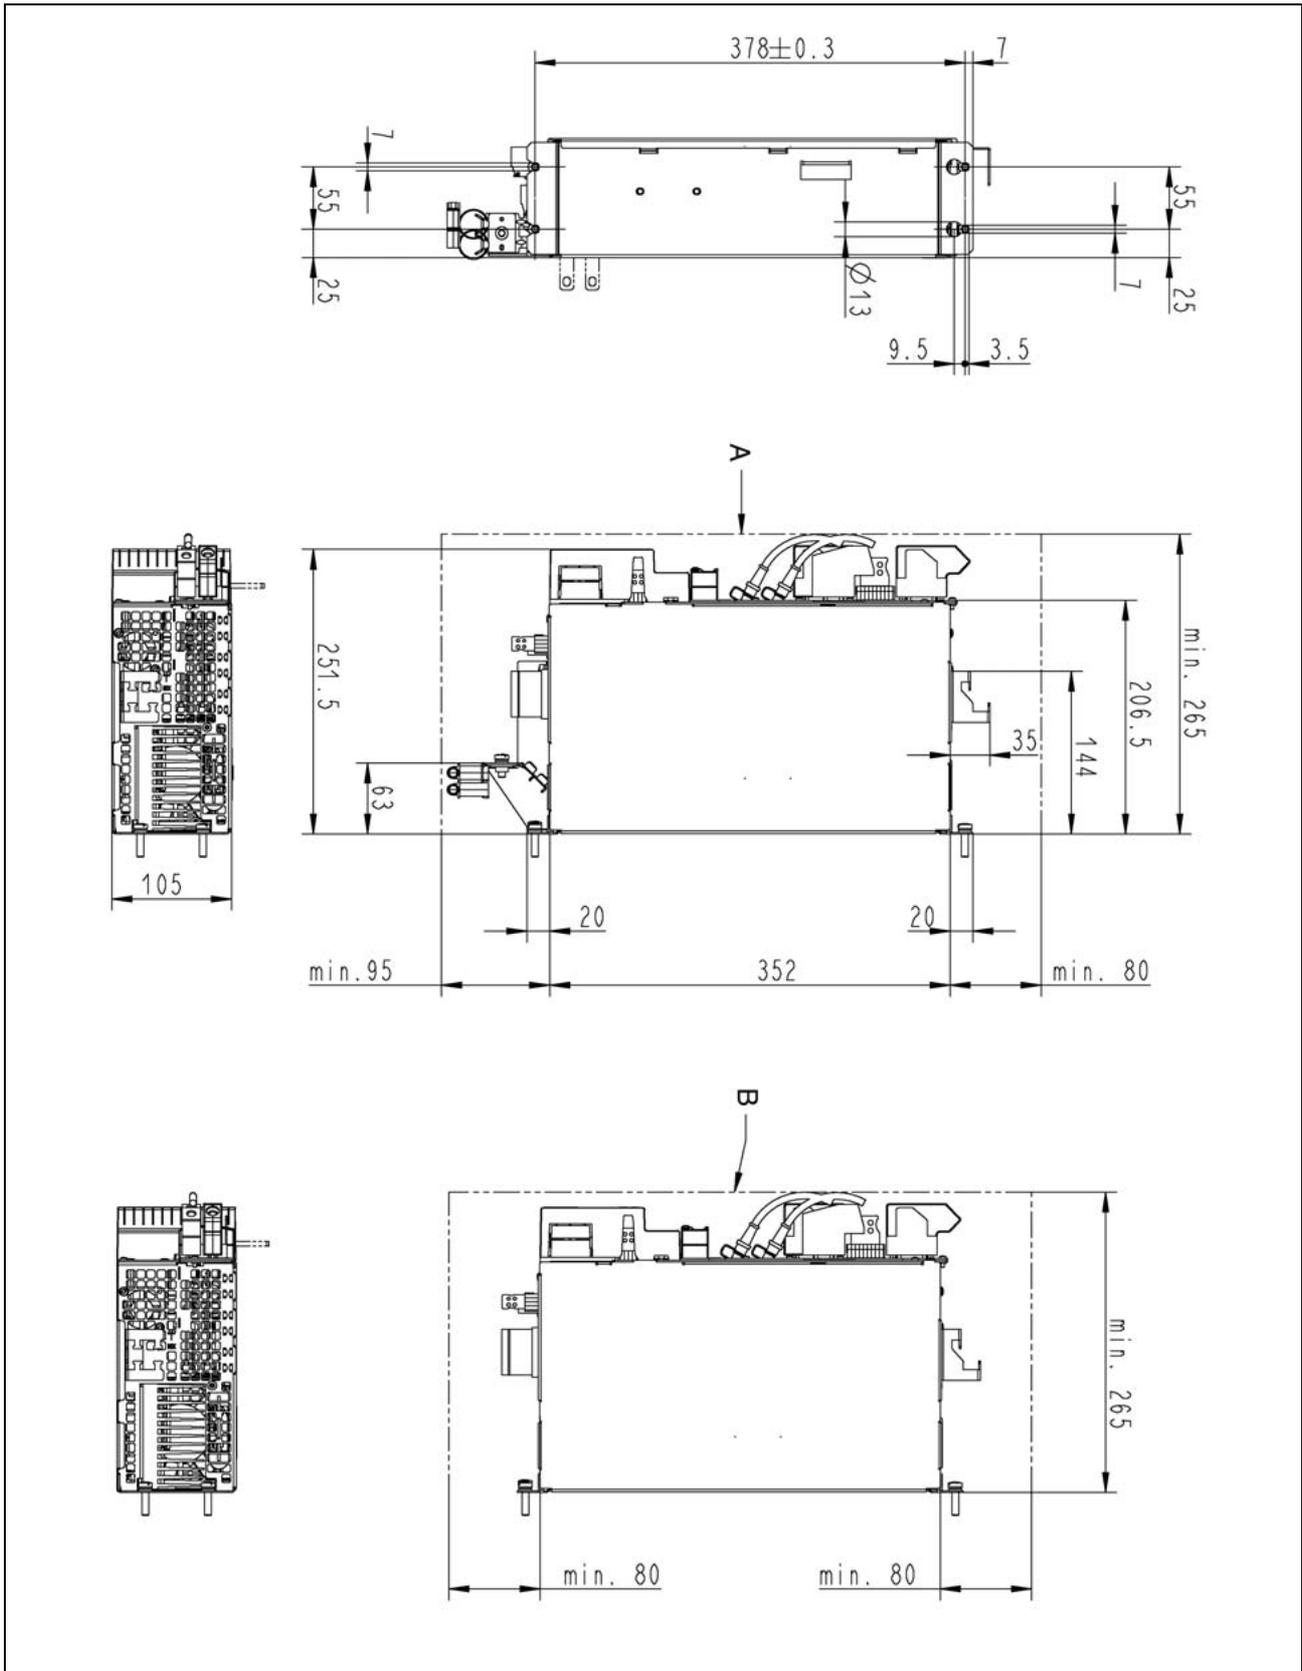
Dimensional drawing HCS02.1E-W0012
